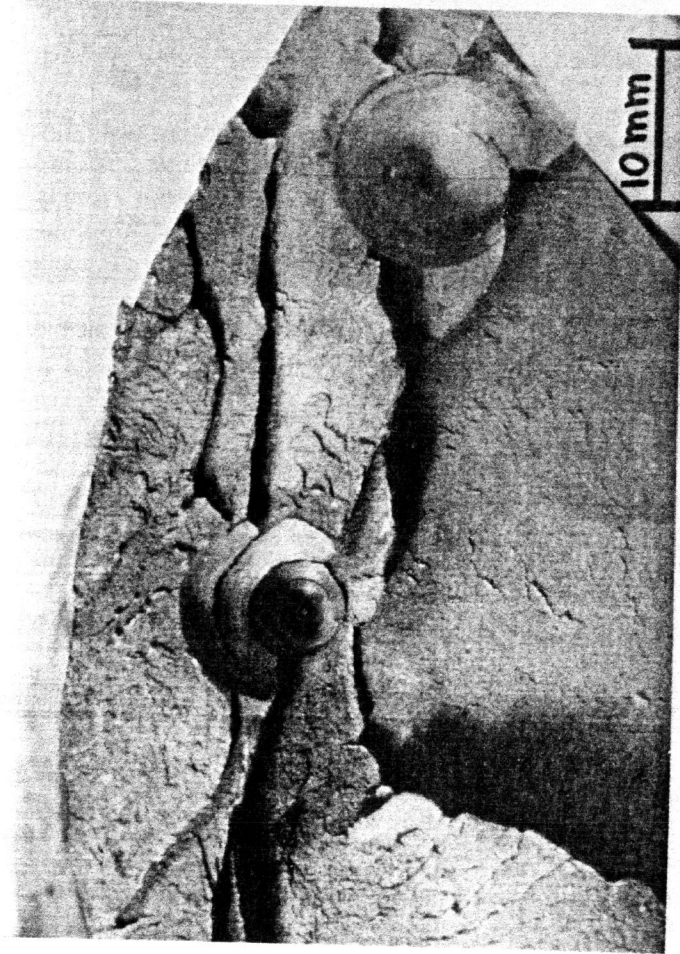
Detail at 12:00 on the Right Fracture Surface
